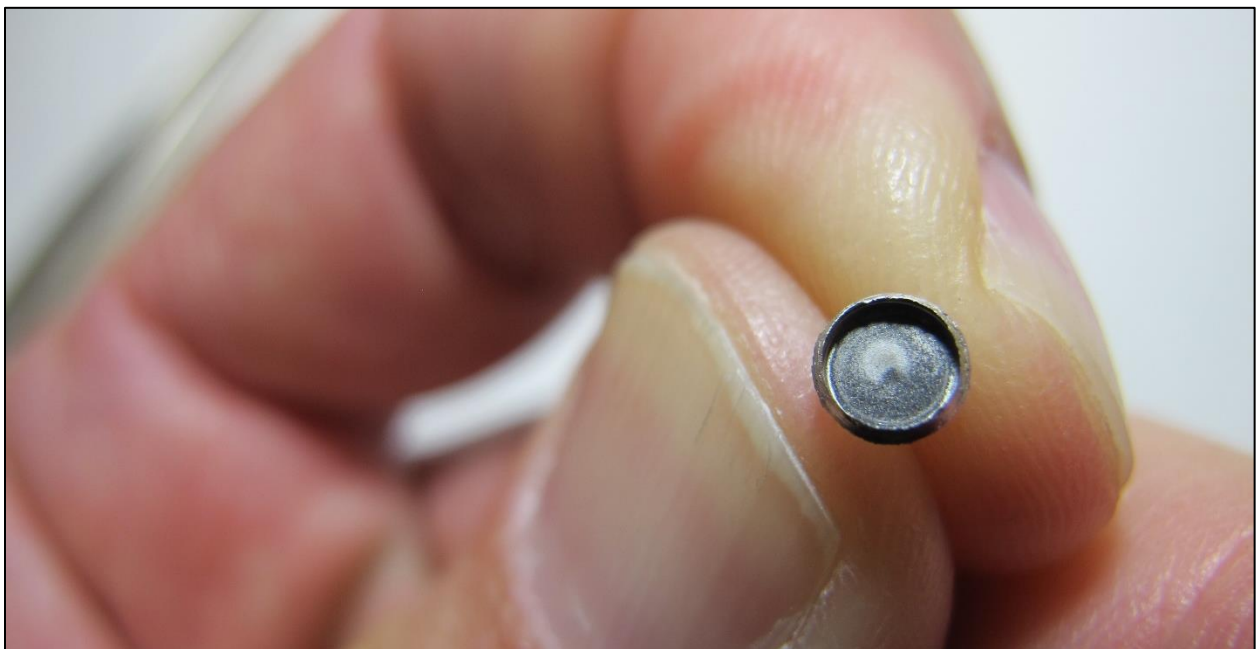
, Modular G-Switch No. 3 Shell Non-Contact End
